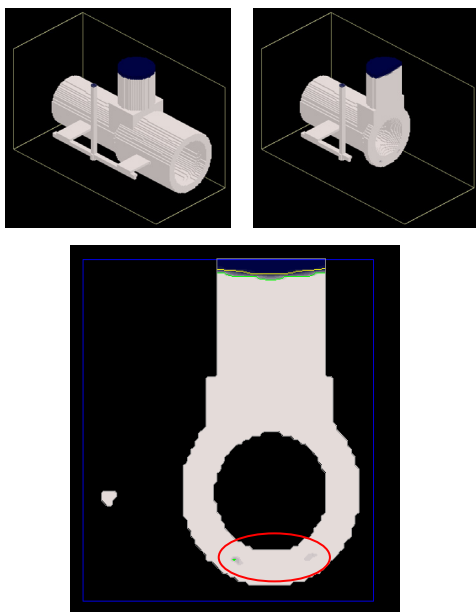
Simulation showing shrinkage in lower parts of the casting.
